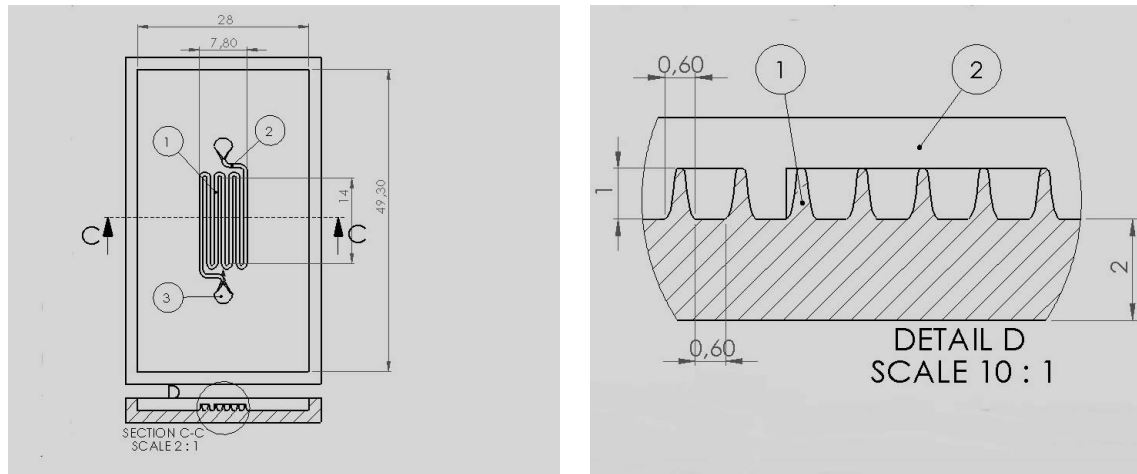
shows the technical drawing of a mold similar to the previous one. Since this technology is still recent, this second design aims to project smaller channels within the dimensions established for the first mold. Figure 3.5a shows the 2 dimension draw of the top view of the second designed mold. The mold has 49,30 mm of width and 28 mm of length, with only 19,30 mm for the channels arrangement. In figure 3.5b the dimensions of the channels are specified. They have 0.4 mm of width, 11 mm of length (3.5a) and a height of 1 mm. The numbered balloons in both 3.5b and 3.5a
